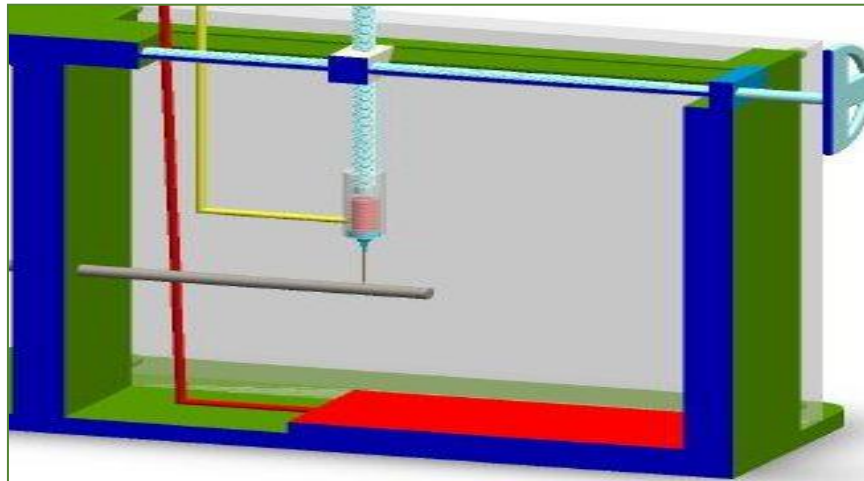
3D CAD drawing of the main machining chamber with tool holding arrangement
